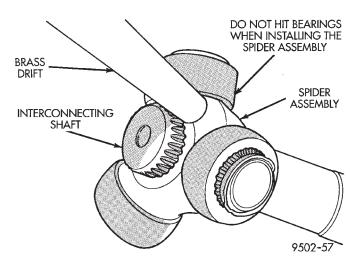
Installing Spider Assembly on InterconnectingShaft
